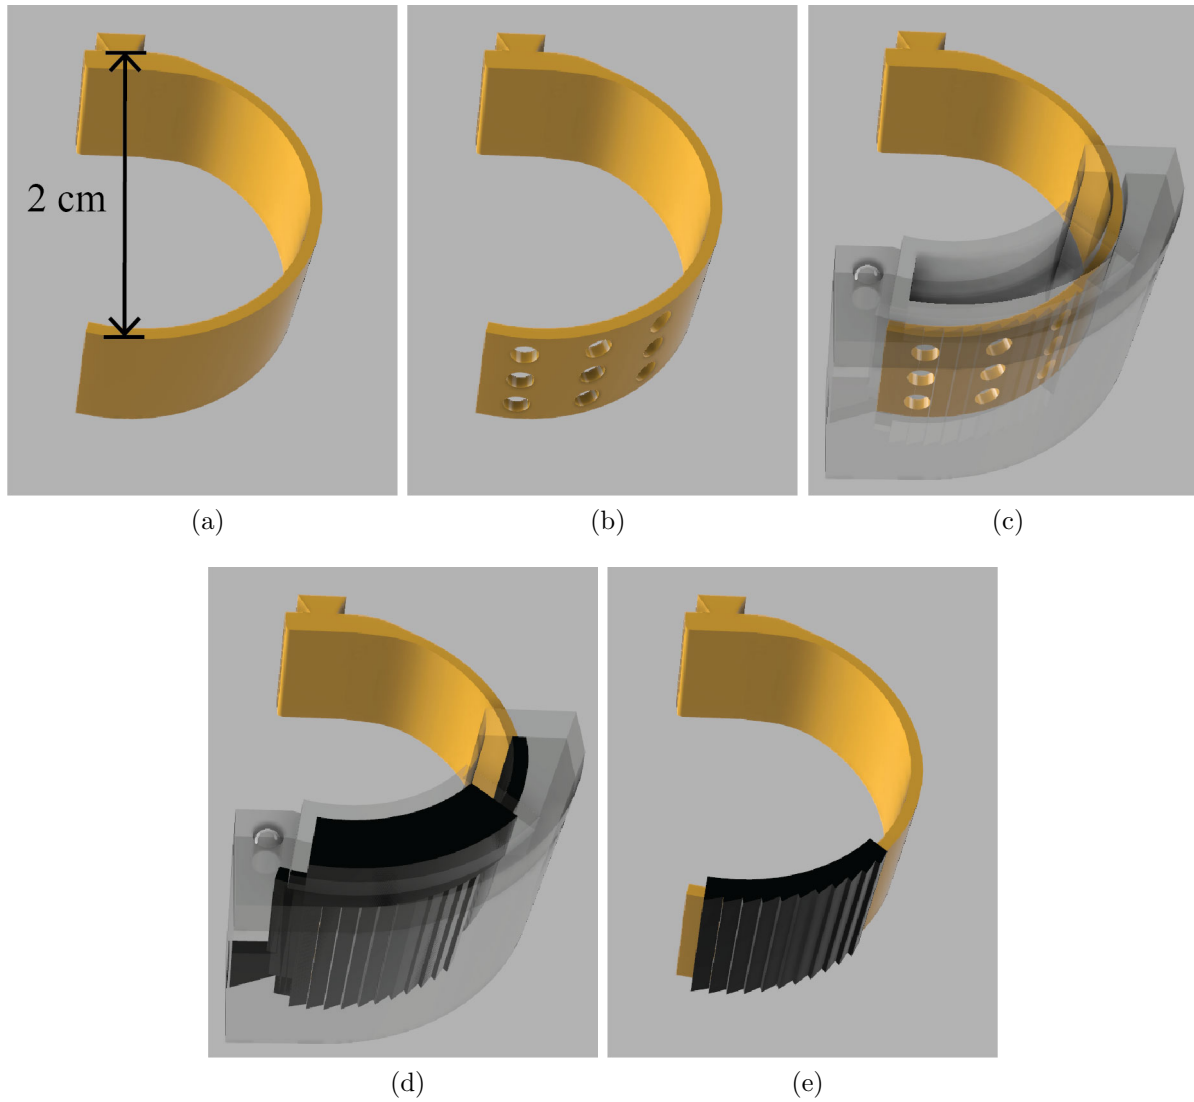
Multi-material leg manufacturing process flow. (a) Cast rigid polyurethane leg. (b) Drill holes for tread attachment. (c) Place leg in two-part tread mold. (d) Cast urethane elastomer overmolded tread. (e) Remove leg from mold and trim away excess urethane elastomer.
